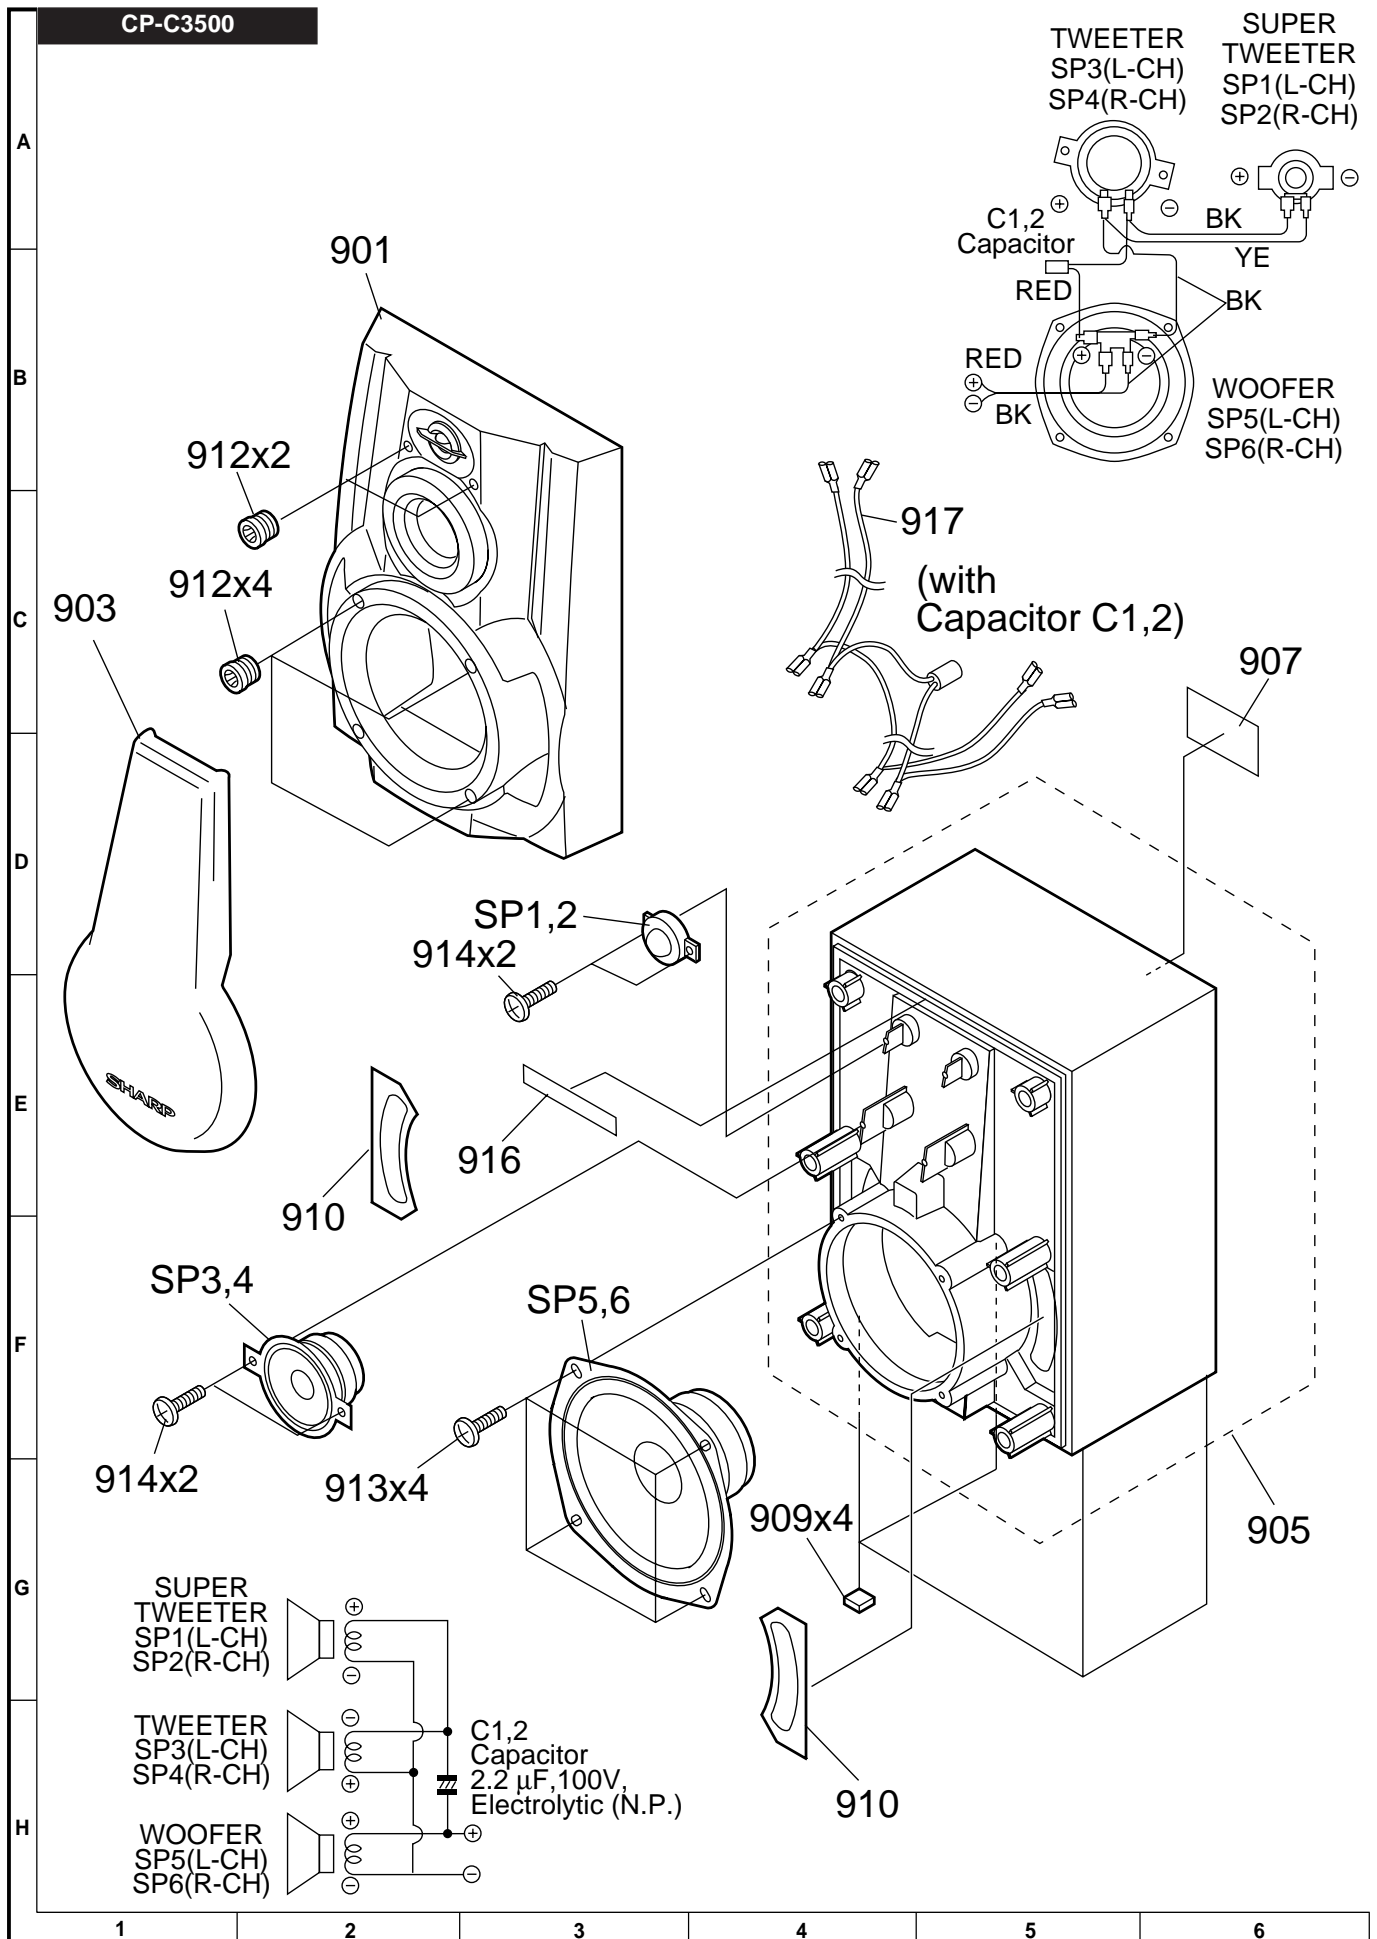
SPEAKER EXPLODED VIEW (1/2)
